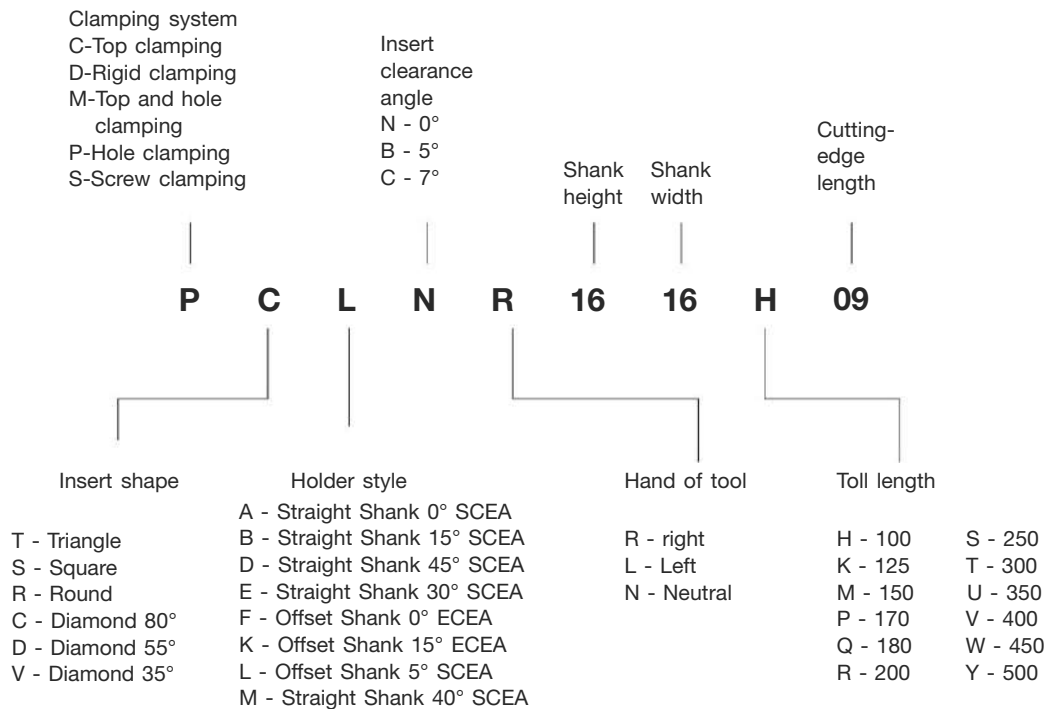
ISO coding system for tungsten carbide turning-tool holders used in external turning (SCEA-Side cutting edge angle, ECEA-end cutting-edge angle)
